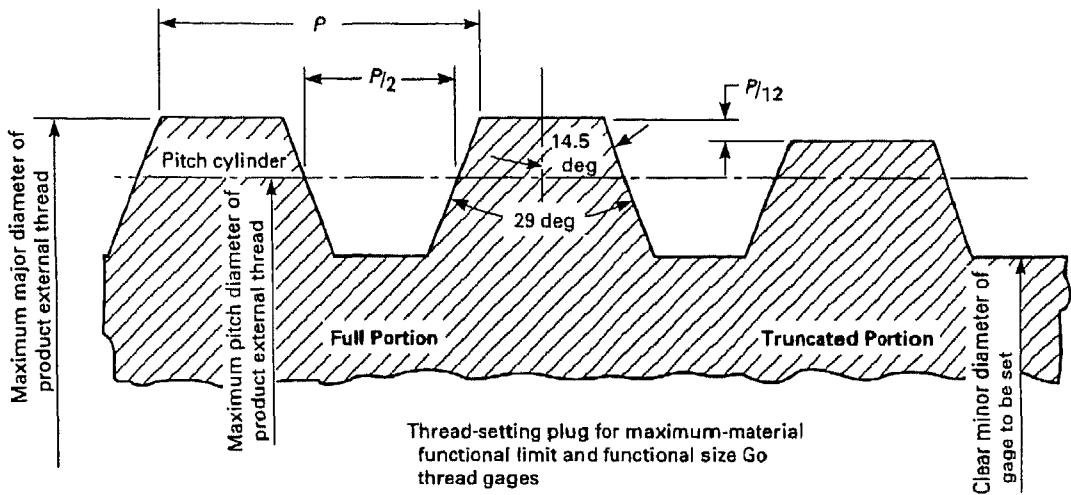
GO THREAD FORM — FULL-FORM AND TRUNCATED SETTING PLUG GAGE FOR EXTERNAL THREAD
